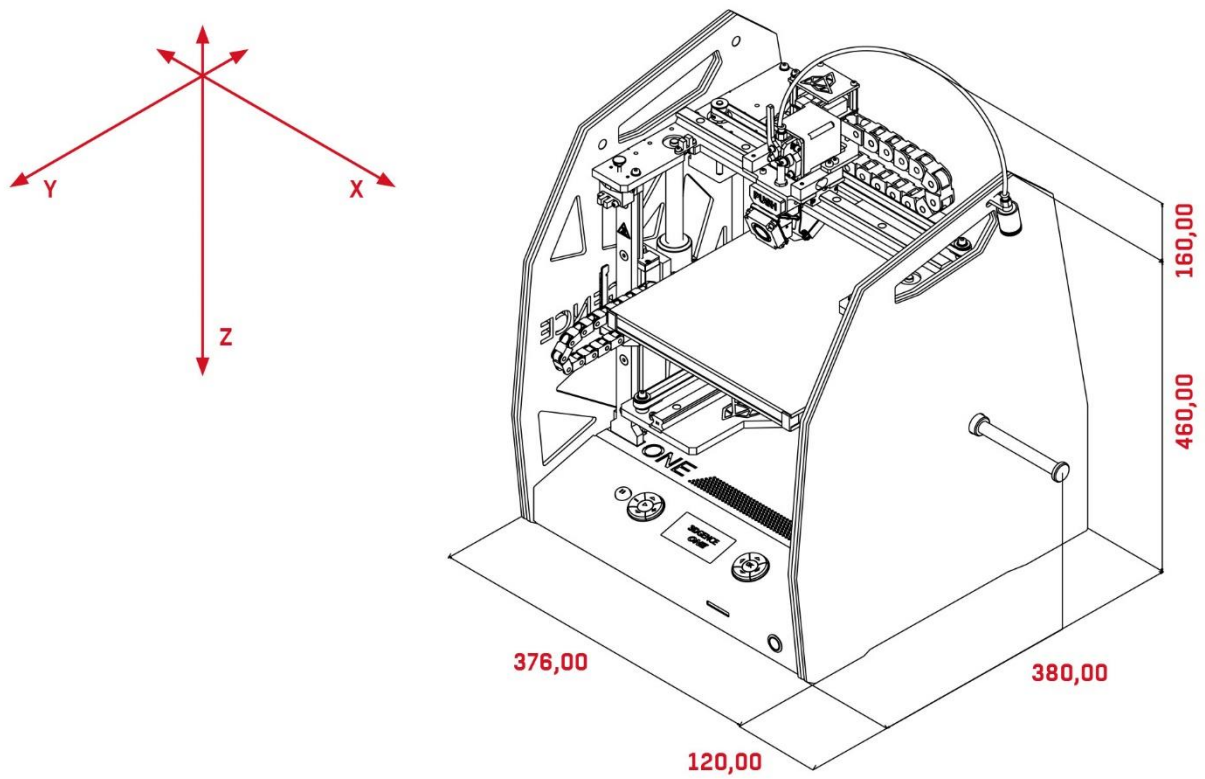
The maximum external dimensions of the printer (accessories included) and markings of X, Y, Z axes
